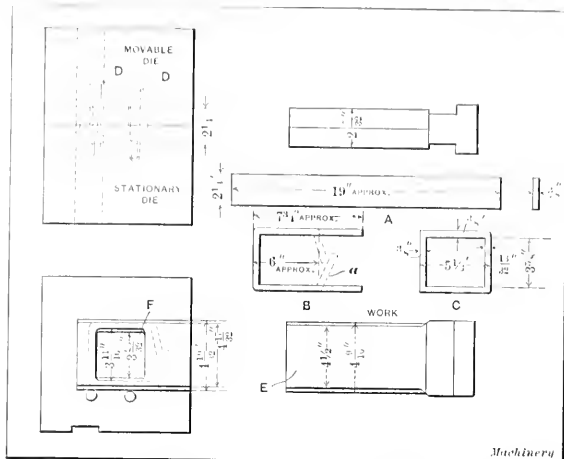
Forging Machine Dies and Tools for making Locomotive Spring Bands
